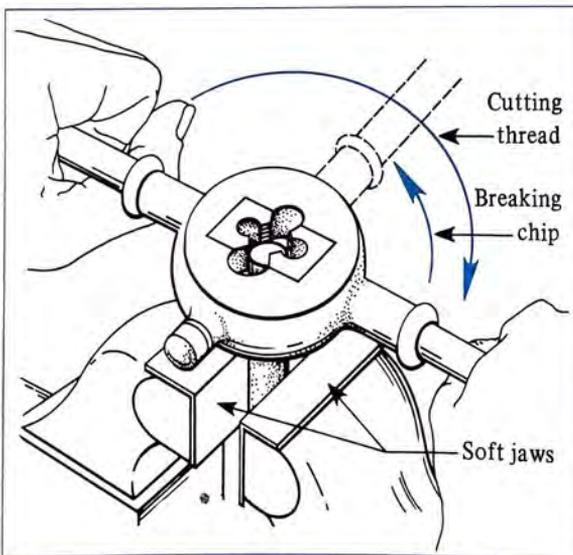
Cutting a Right-Hand Thread and Reversing the Stroke to Break the Chips
